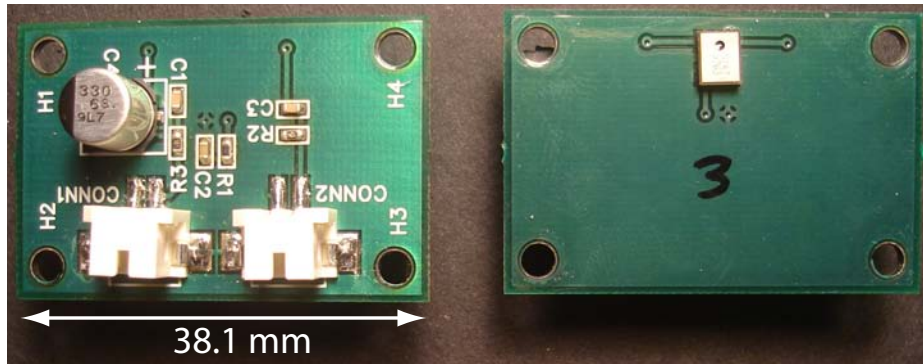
Detail view of fabricated microphone PCB used in the large-scale array
